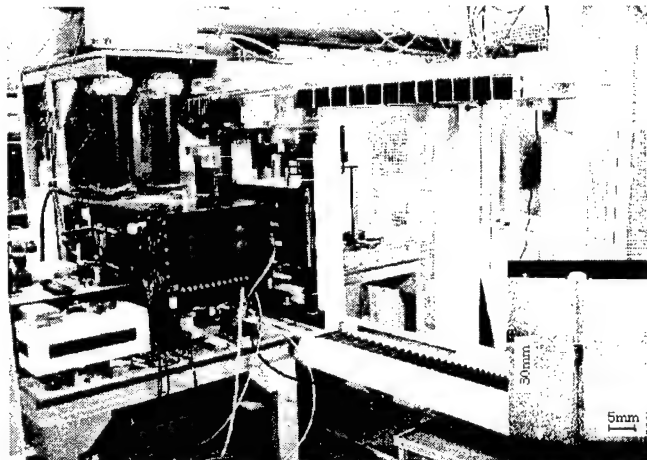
Laser processing machine and welded sample of stainless steel
